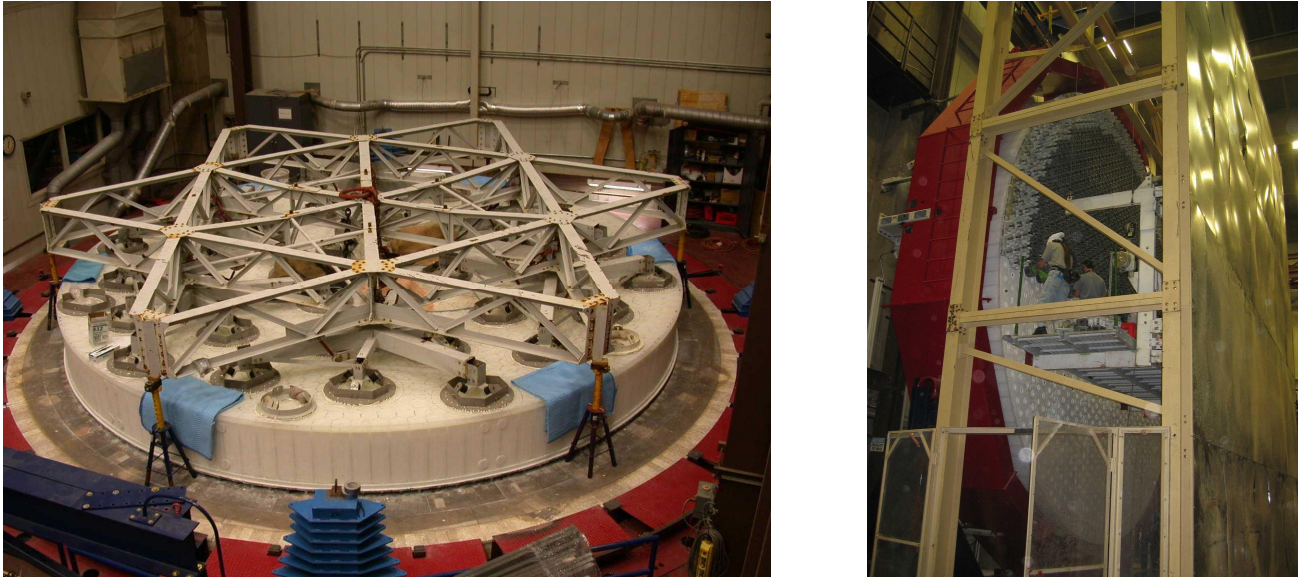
First GMT segment with lifting fixture attached (left) and supported vertically in the washout stand (right) where parts of the mold are removed from the segment.
